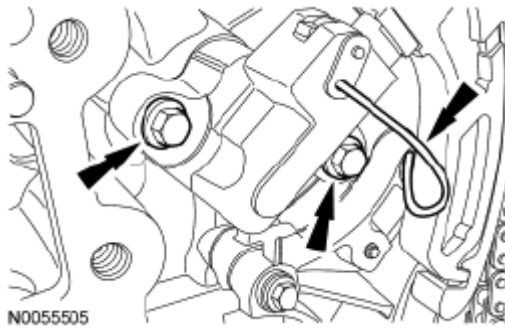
Locating Primary Tensioner Bolts And Lockpin
